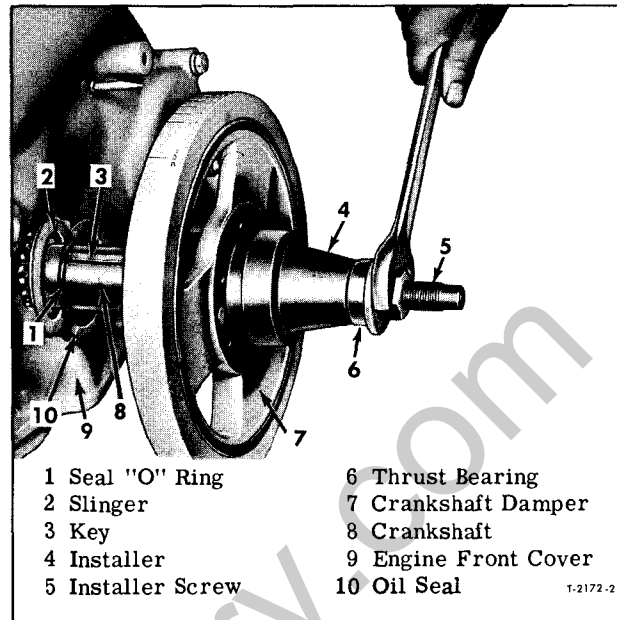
Installing Damper Assembly on Crankshaft with Special Tool Set
